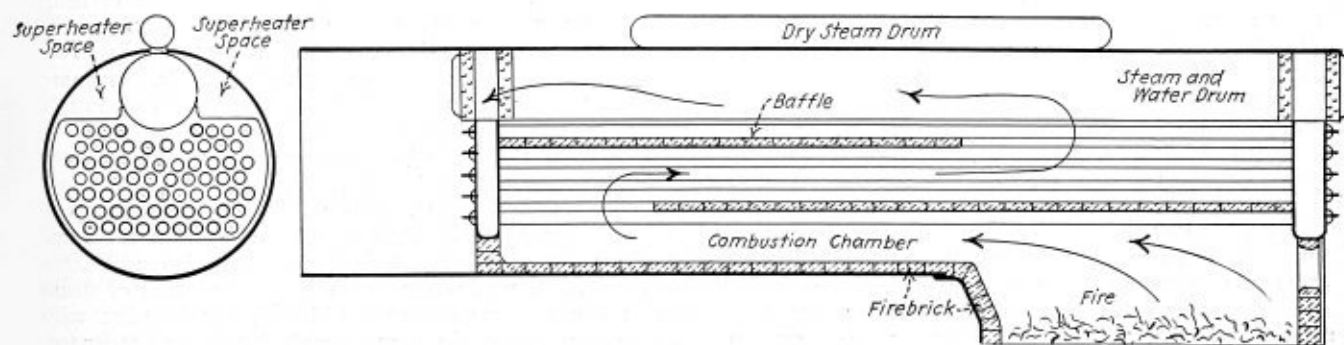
Watertube locomotive boiler with tubes disposed horizontally
